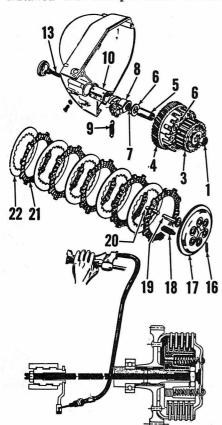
Exploded view of clutch assembly used on T10 and S32 models.
